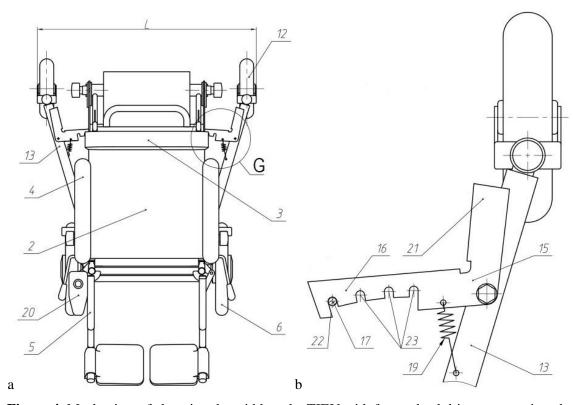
Mechanism of changing the width at the TIEV with front wheel drive. a - top view; b - view of G by b (increased). 2 - the seat; 3 - backrest, 4 - armrests; 5 - feet support; 6 - front driving wheel; 12 - rear wheel; 13 - the upper rod of the side frame 8; 15 - two-arm lever; 16 - shoulder of double-armed lever 15 with grooves 22-23; 17 - retainer; 19 - tension spring; 20 - joystick; 21 - the shoulder of the two-arm lever 15; 22, 23 - grooves of the shoulder 16 of the two-arm lever 15.
